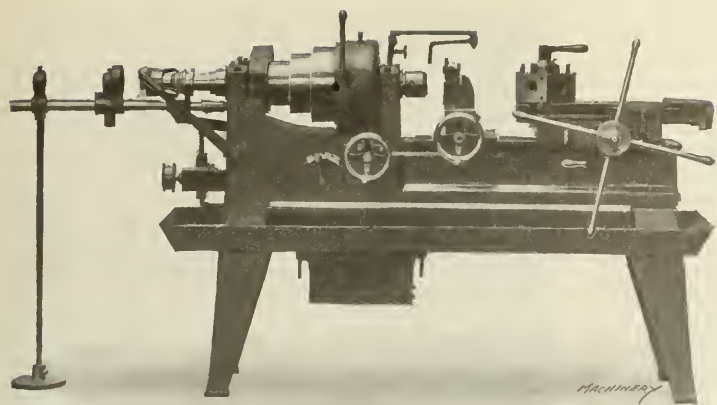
Hand Screw Machine built by Universal Machinery Co.
